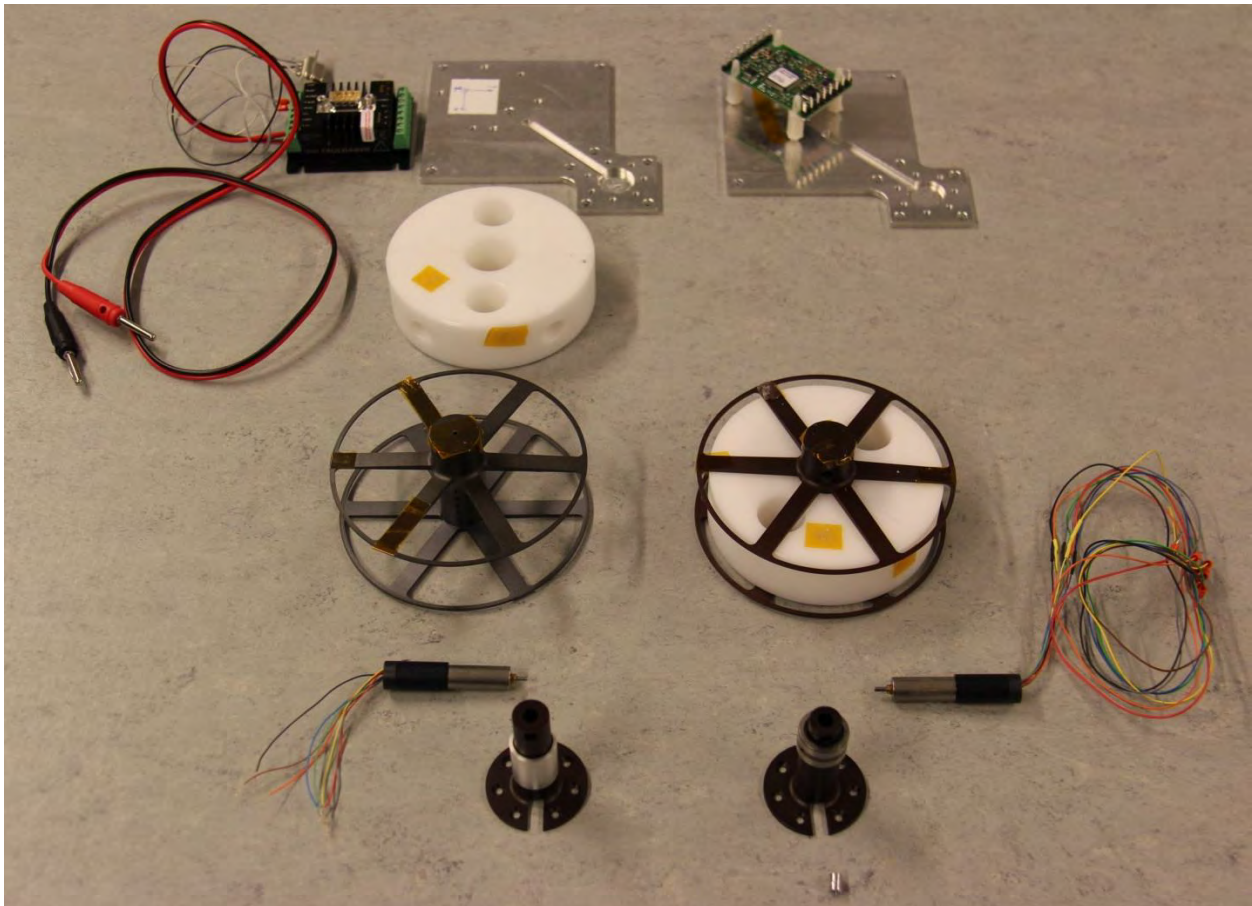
Auxiliary tether reel parts for both configurations. On the left hand side, the parts of the sliding bearing are disassembled (from top to bottom): Motor controller (with housing and electrical interface), base plate, tether mass dummy, tether reel, motor and motor holder equipped with a thin aluminum cylinder for the sliding bearing. On the right hand side the parts of the roller bearing configuration are shown. From top to bottom: Motor controller (without housing) mounted on the base plate, tether reel equipped with the tether dummy mass, motor and motor holder equipped with the roller bearing.
